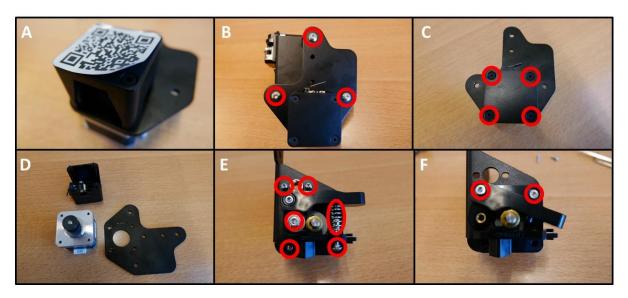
Procedure for disassembling the X Motor Assembly. A) Peel away the sticker. B) Remove the three roller screws. C) Remove the pulley cover. D) The freed up parts. Save the stepper motor. E) Remove all screws and the spring indicated in red. F) Remove the screws holding the filament clamp in place.
